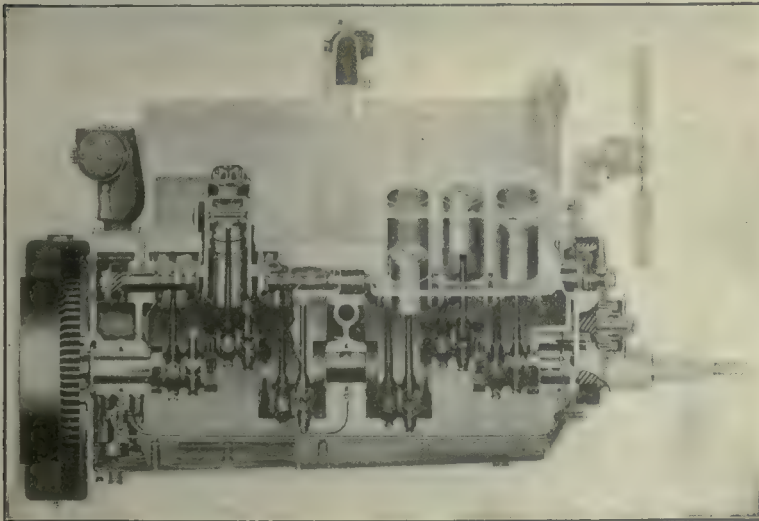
PHANTOM VIEW OF TWELVE-CYLINDER ENGINE
